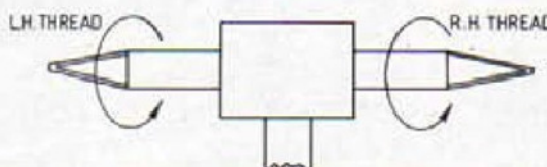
VIEW OF POLISHING SPINDLE FROM FRONT
